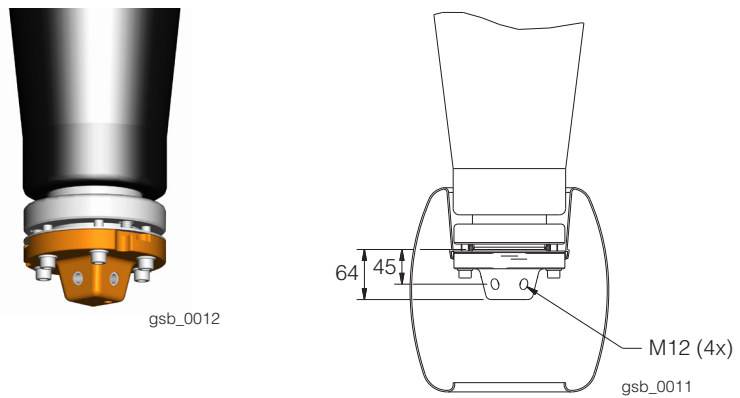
Fixed bottom contact 1ZSC999002-AAE.
